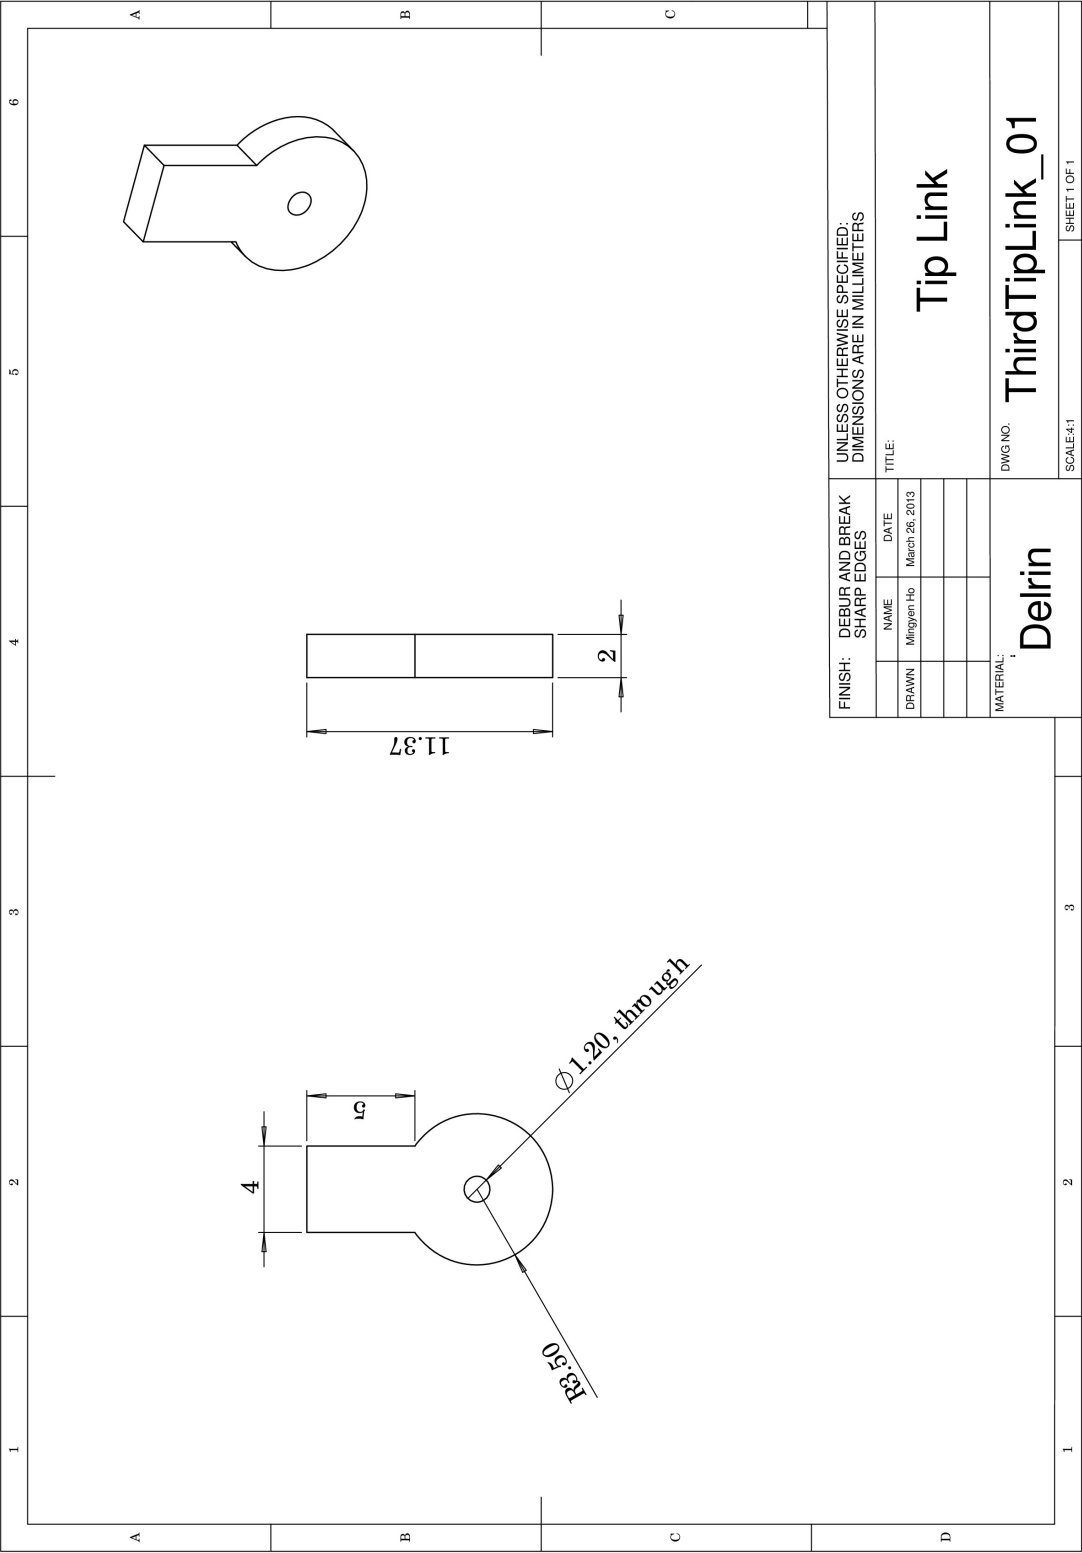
Engineering drawing of the tip link of the SMA spring actuated MINIR.
